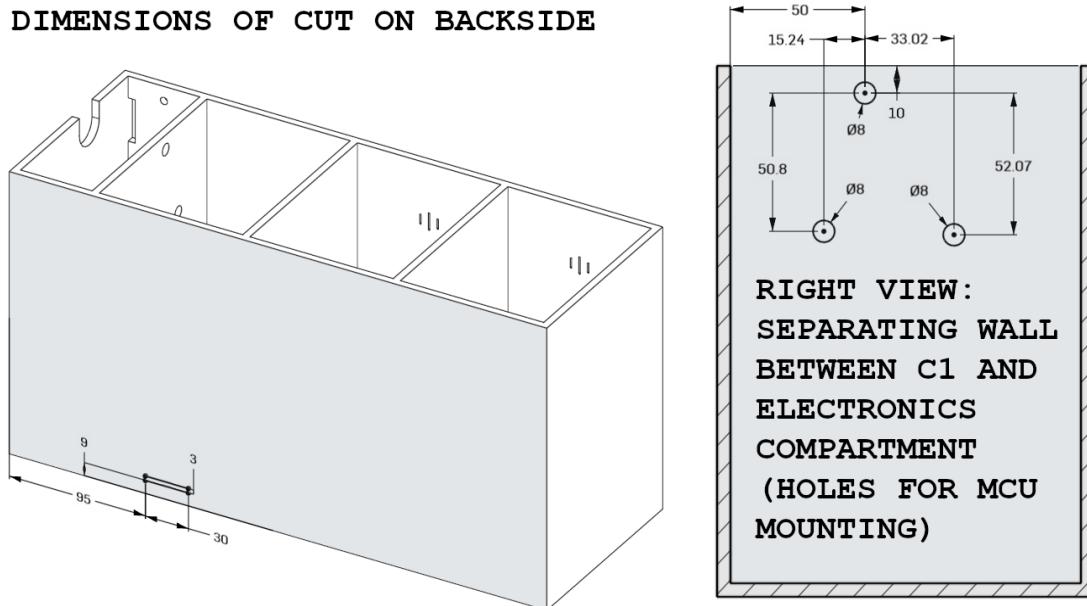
Back-left-top view (left) and MCU mounting hole dimensions (right)
